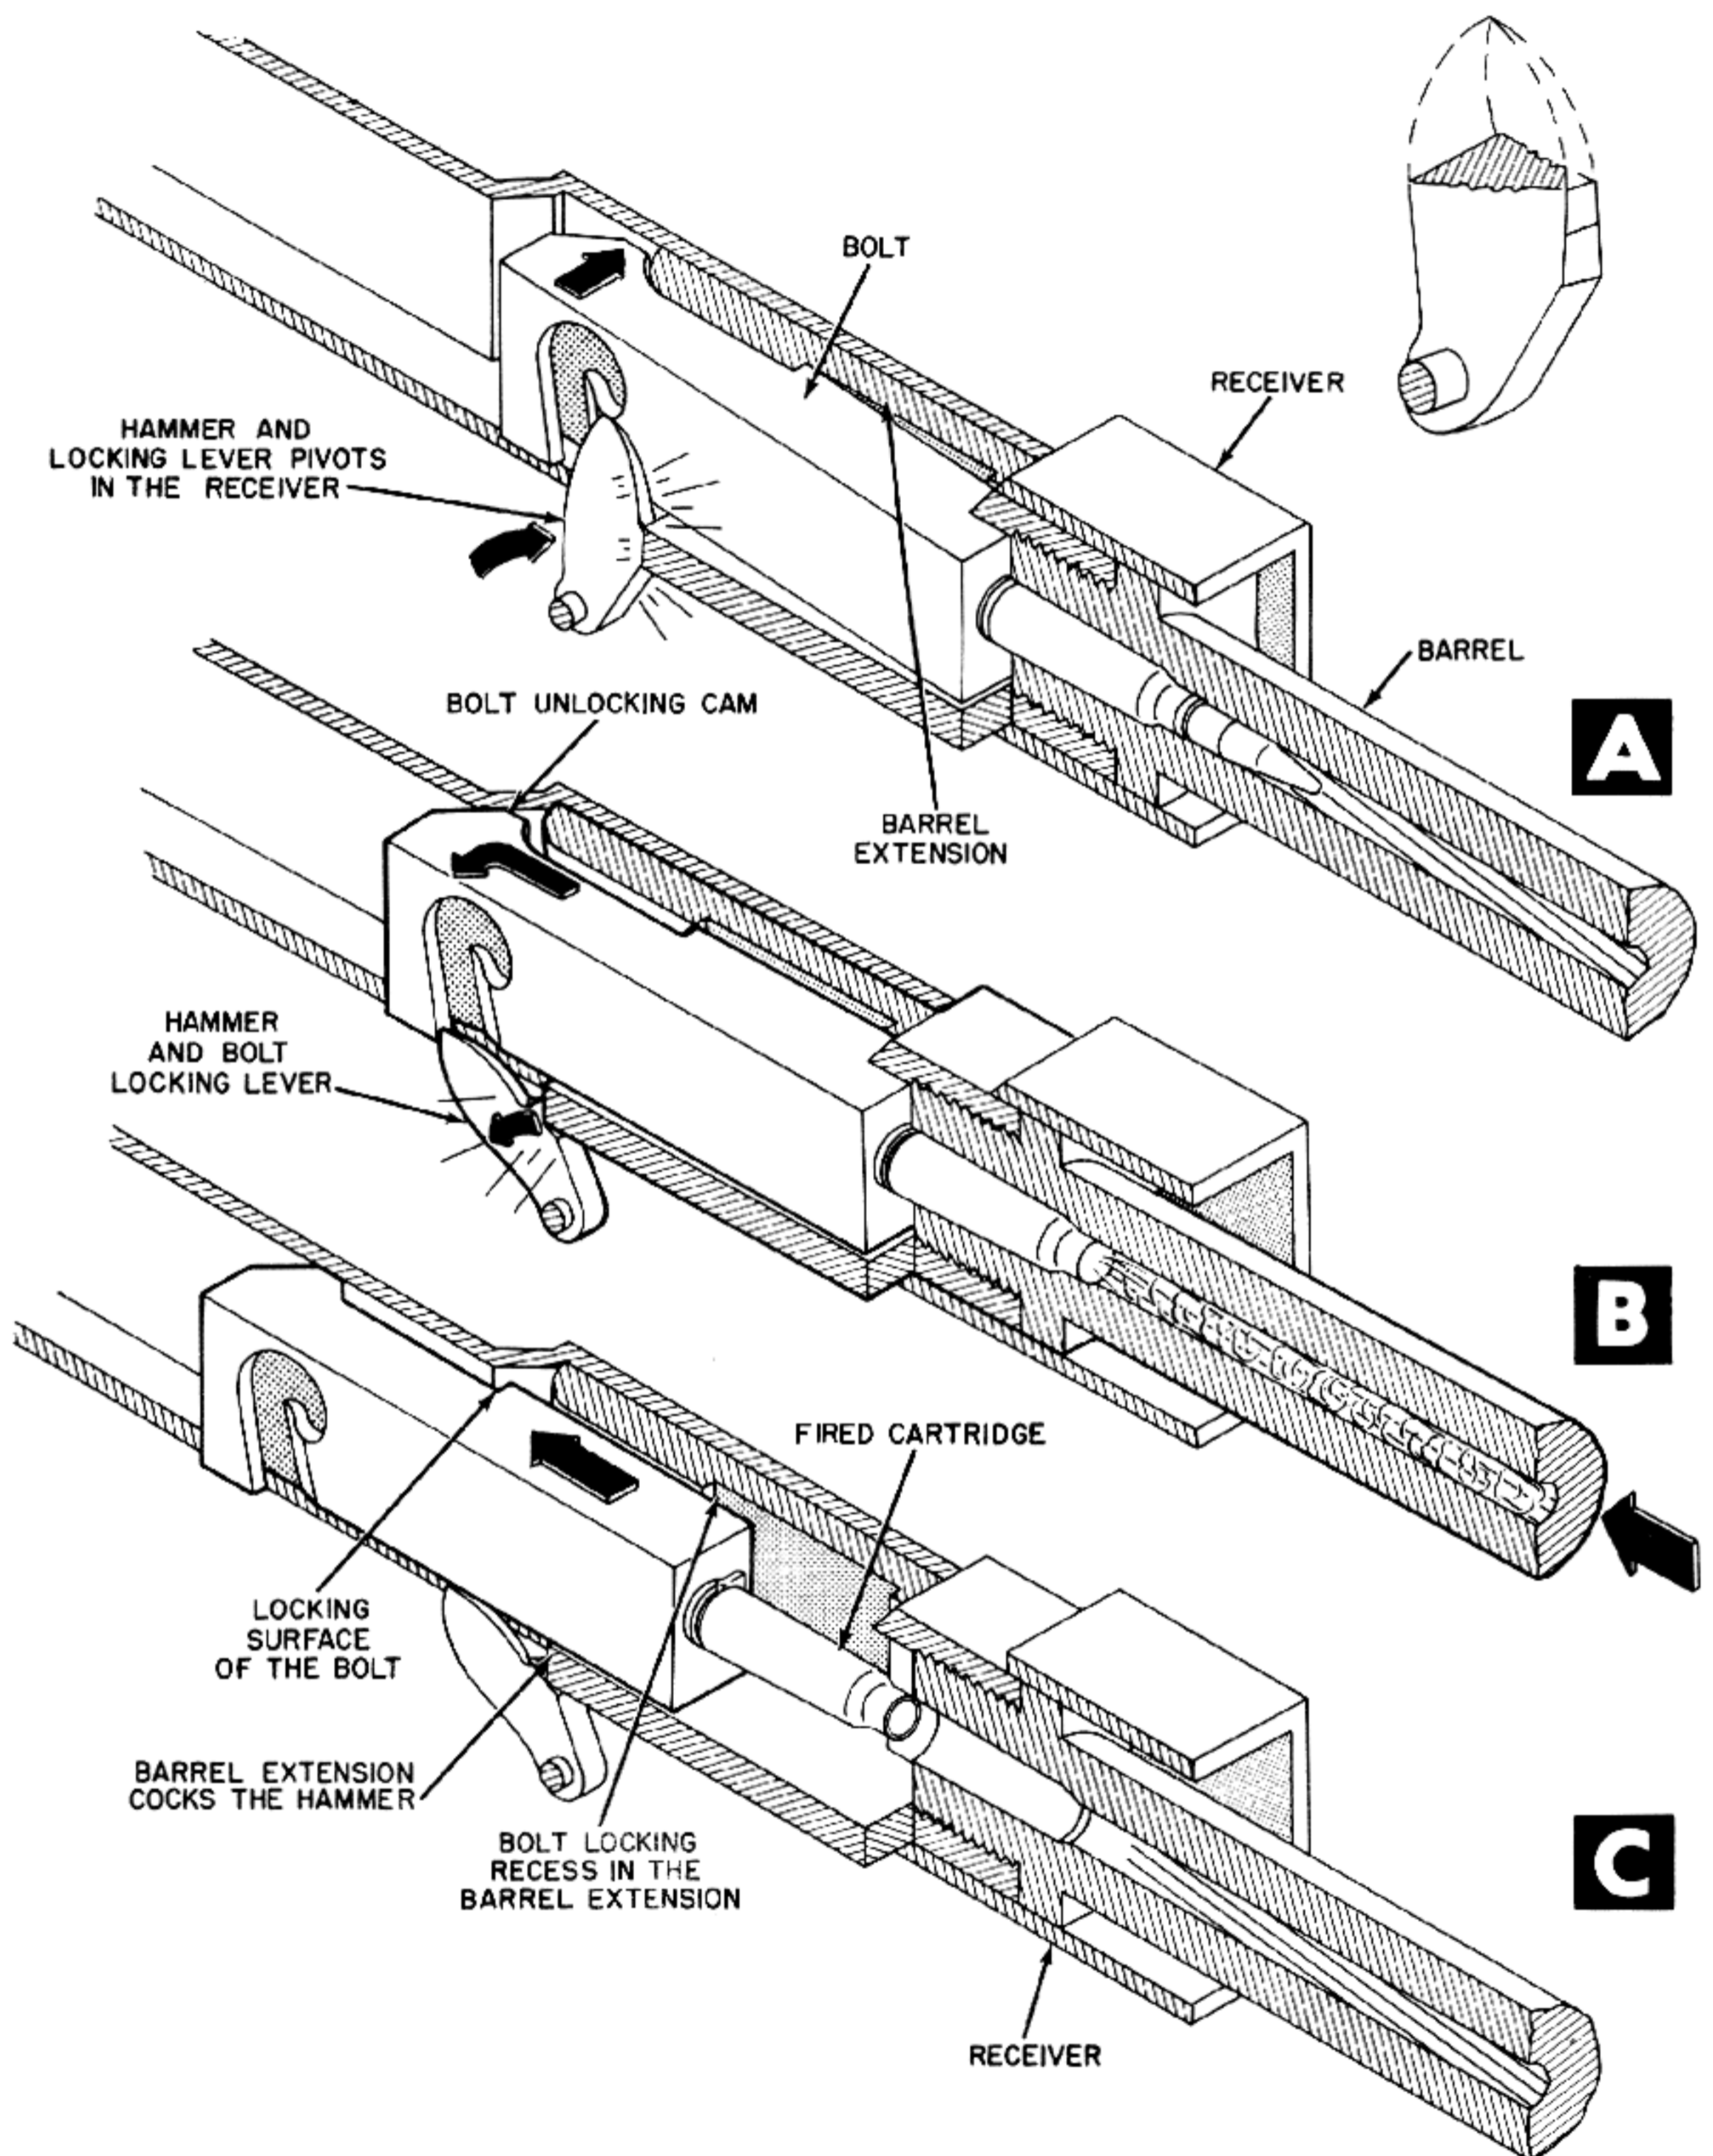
Bolt Is Forced Into Locked Position by Action of Hammer.
